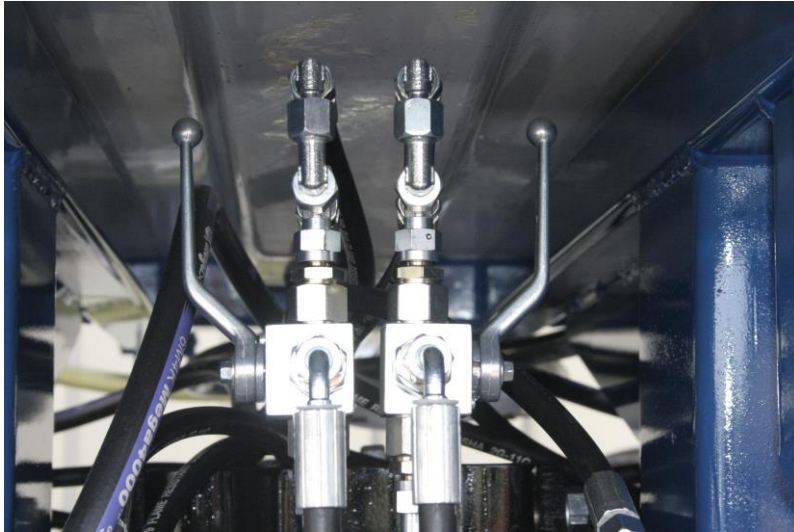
Control Valve Levers in the Machine Unfolding and Folding Position
